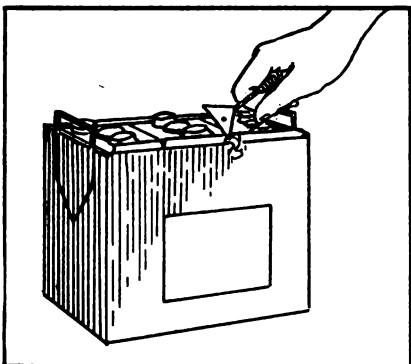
THE SCRAPER IS USED TO REMOVE THE COMPOUND FROM THE COVER EDGES
